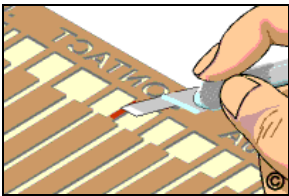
Scrape off the bonding film from solder joint area on the back side.
